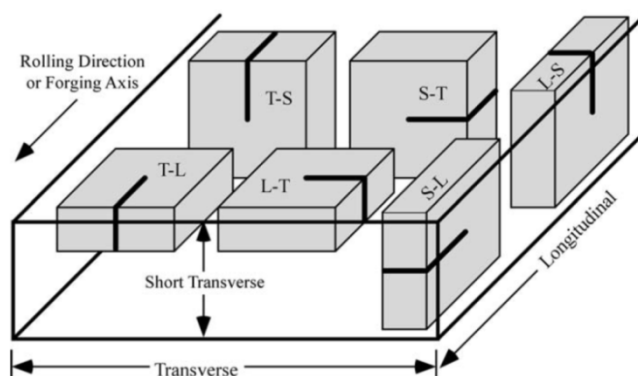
ASTM notation for specimens extracted from rolled plate and forgings [2.19]
